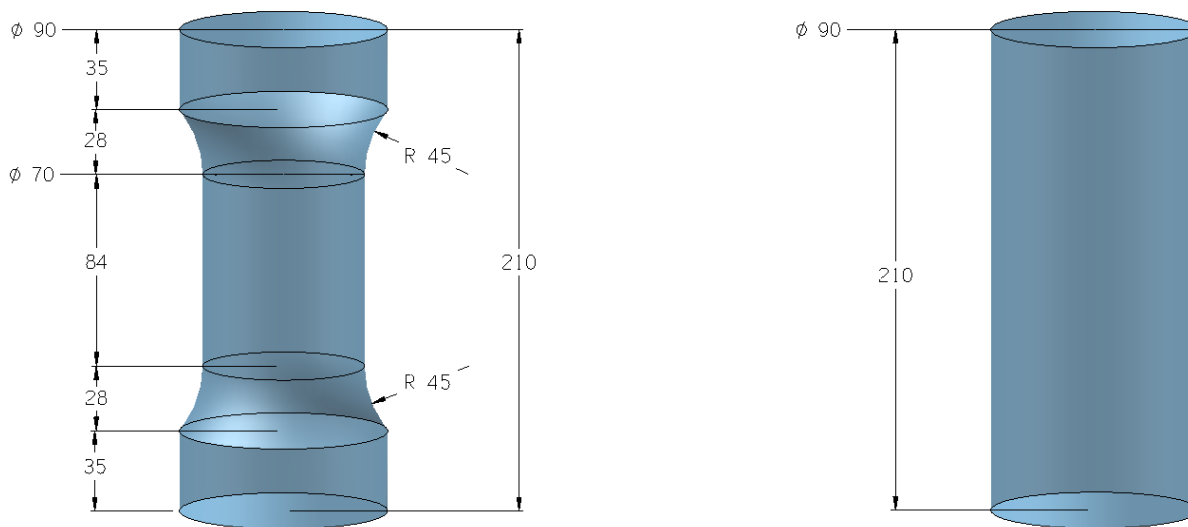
Schematic view of the dumbbell shape (left) and cylindrical (right) ice specimen, all dimensions are in millimeters
